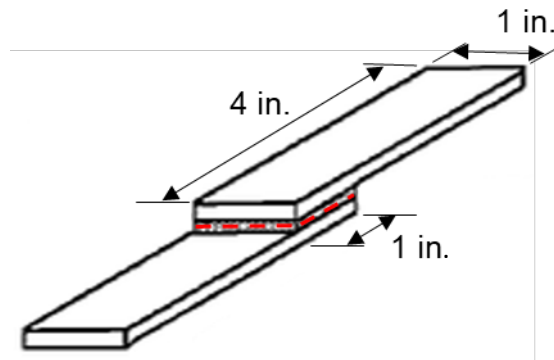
Single lap shear specimen dimensions with weld area shown as red dashed lines.
